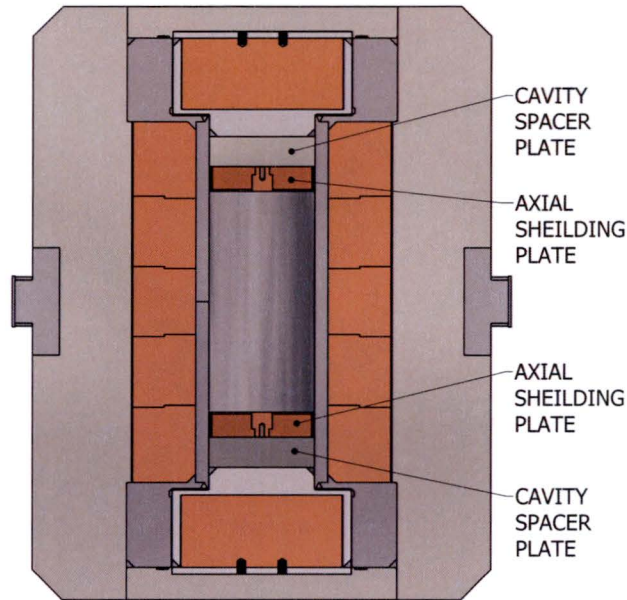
Model AOS-100A-S with Axial Shielding Plates and Cavity Spacer Plates
